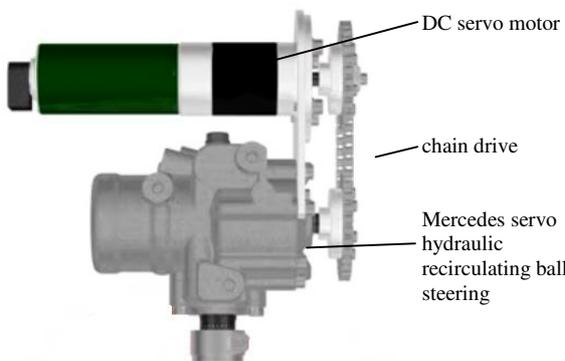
DC-servomotor with hydraulic power steering combined to the electro hydraulic tilting unit
